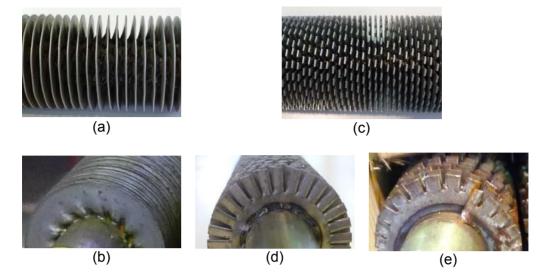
Pictures of the used carbon steel finned tubes. (a) solid finned tube, view from the side–geometry 3; (b) solid finned tube–Geometry 2; (c) serrated finned tube, view from the side–Geometry 1; (d) serrated finned tube with high fins–Geometry 1; (e) serrated finned tube with low fins–Geometry 7
